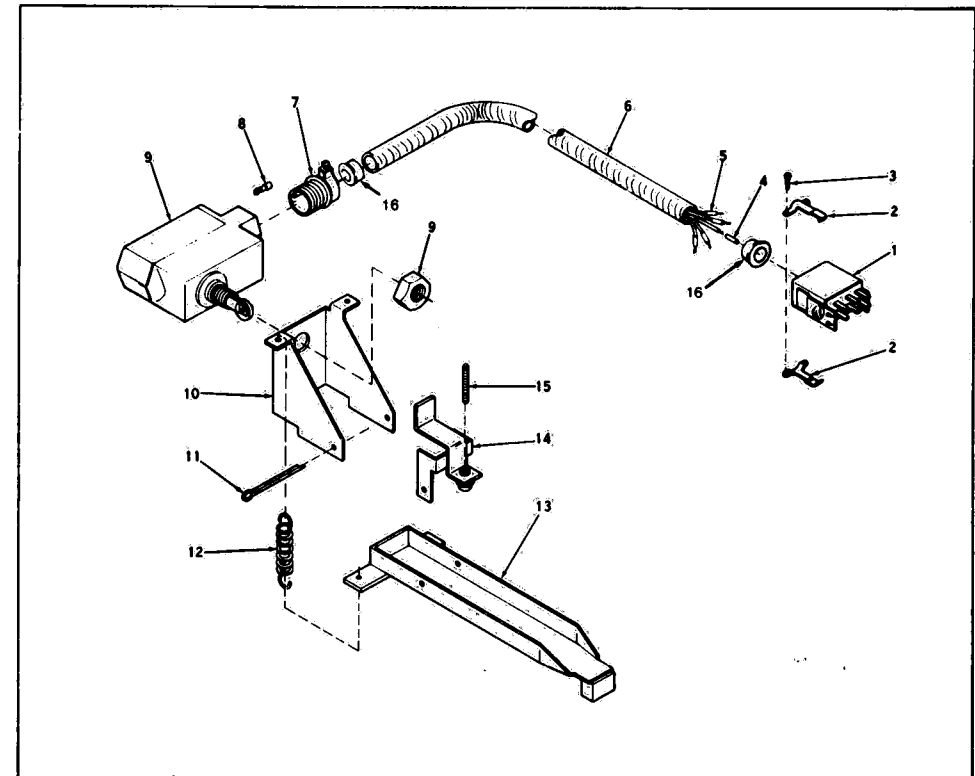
DOOR SWITCH ASSEMBLY (For Units Shipped Before 9/76).
